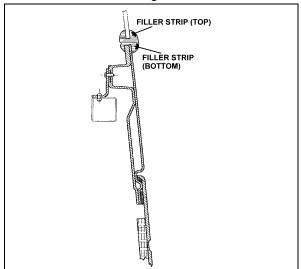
WINDSHIELD INSTALLATION SIDE VIEW 8099
